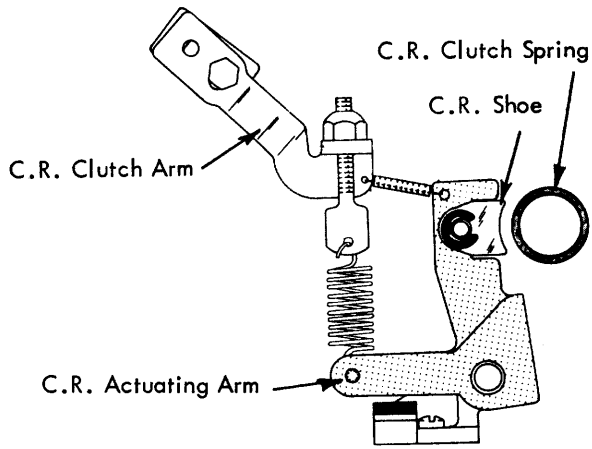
Carrier Return Clutch Actuating Mechanism
